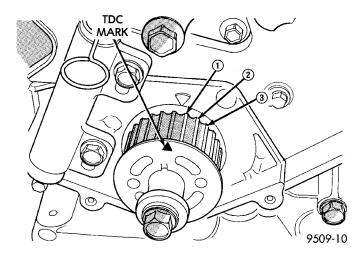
Crankshaft Sprocket 3 Notches Before TDC
